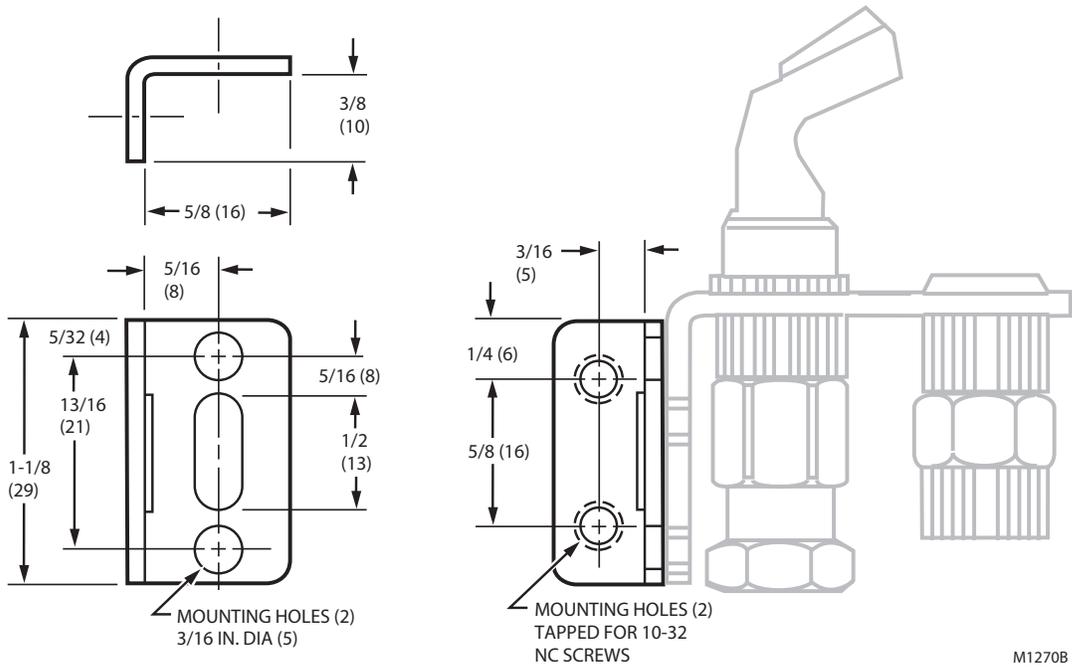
Q314 "A" mounting bracket adapter dimensions
